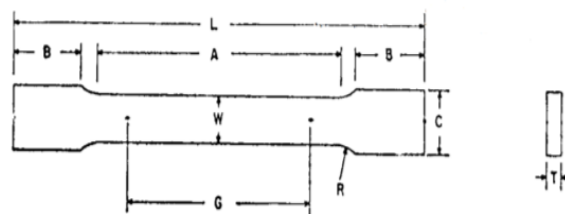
Tensile test specimen ASTM E8/E8M-09.
